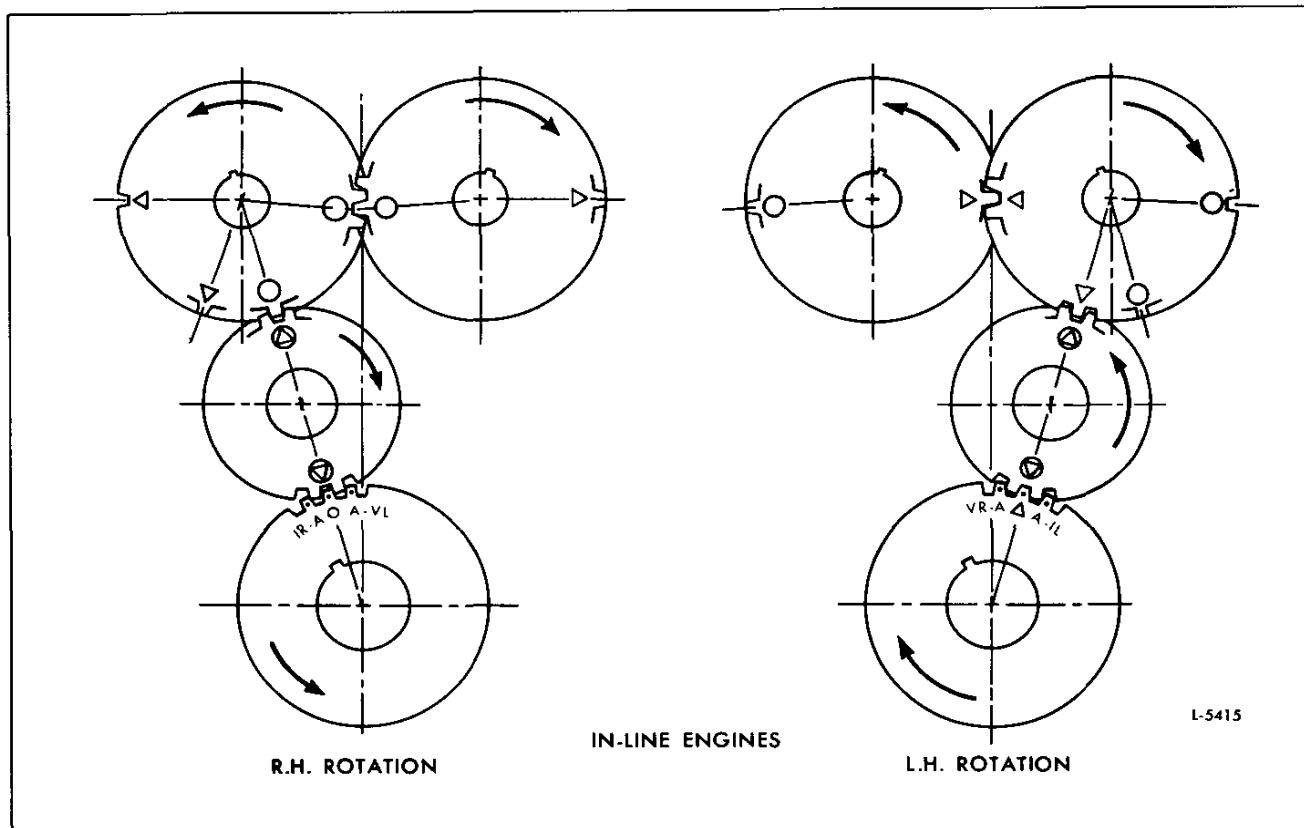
In-Line Engine Gear Train Timing Mark (Standard Timing Shown)
